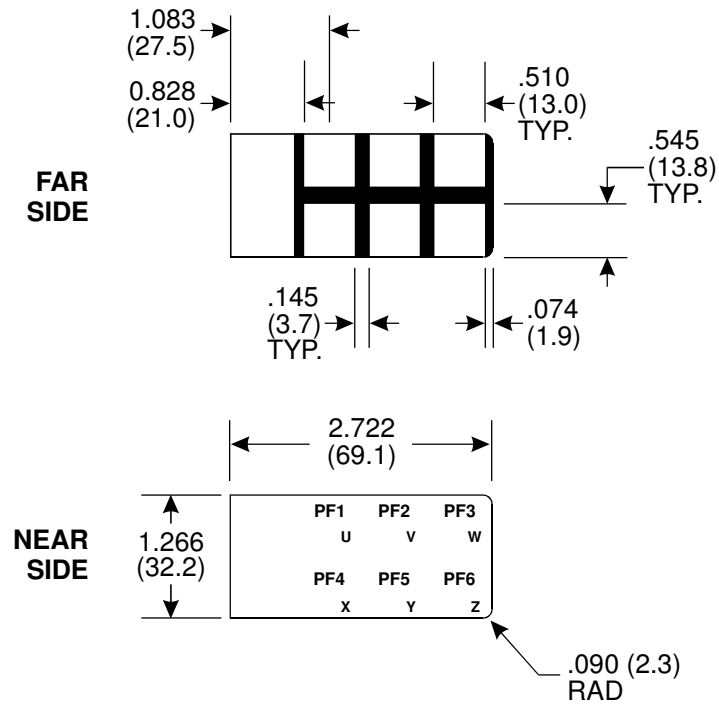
3310KP/3312KP F1-F20 Insert Dimensions
